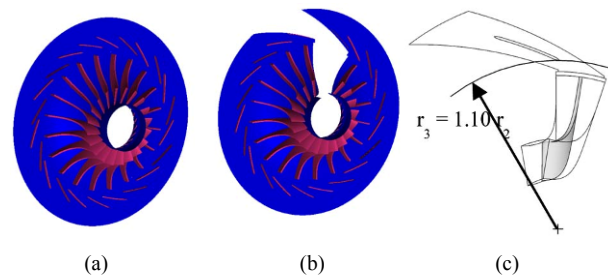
(a) 3D view of the impeller blades and diffuser vane fitted on the hub wall; (b) with the removal of one set of impeller blade and diffuser vane; (c) one set of impeller and diffuser vane passage showing the leading edge location of the diffuser vane.
